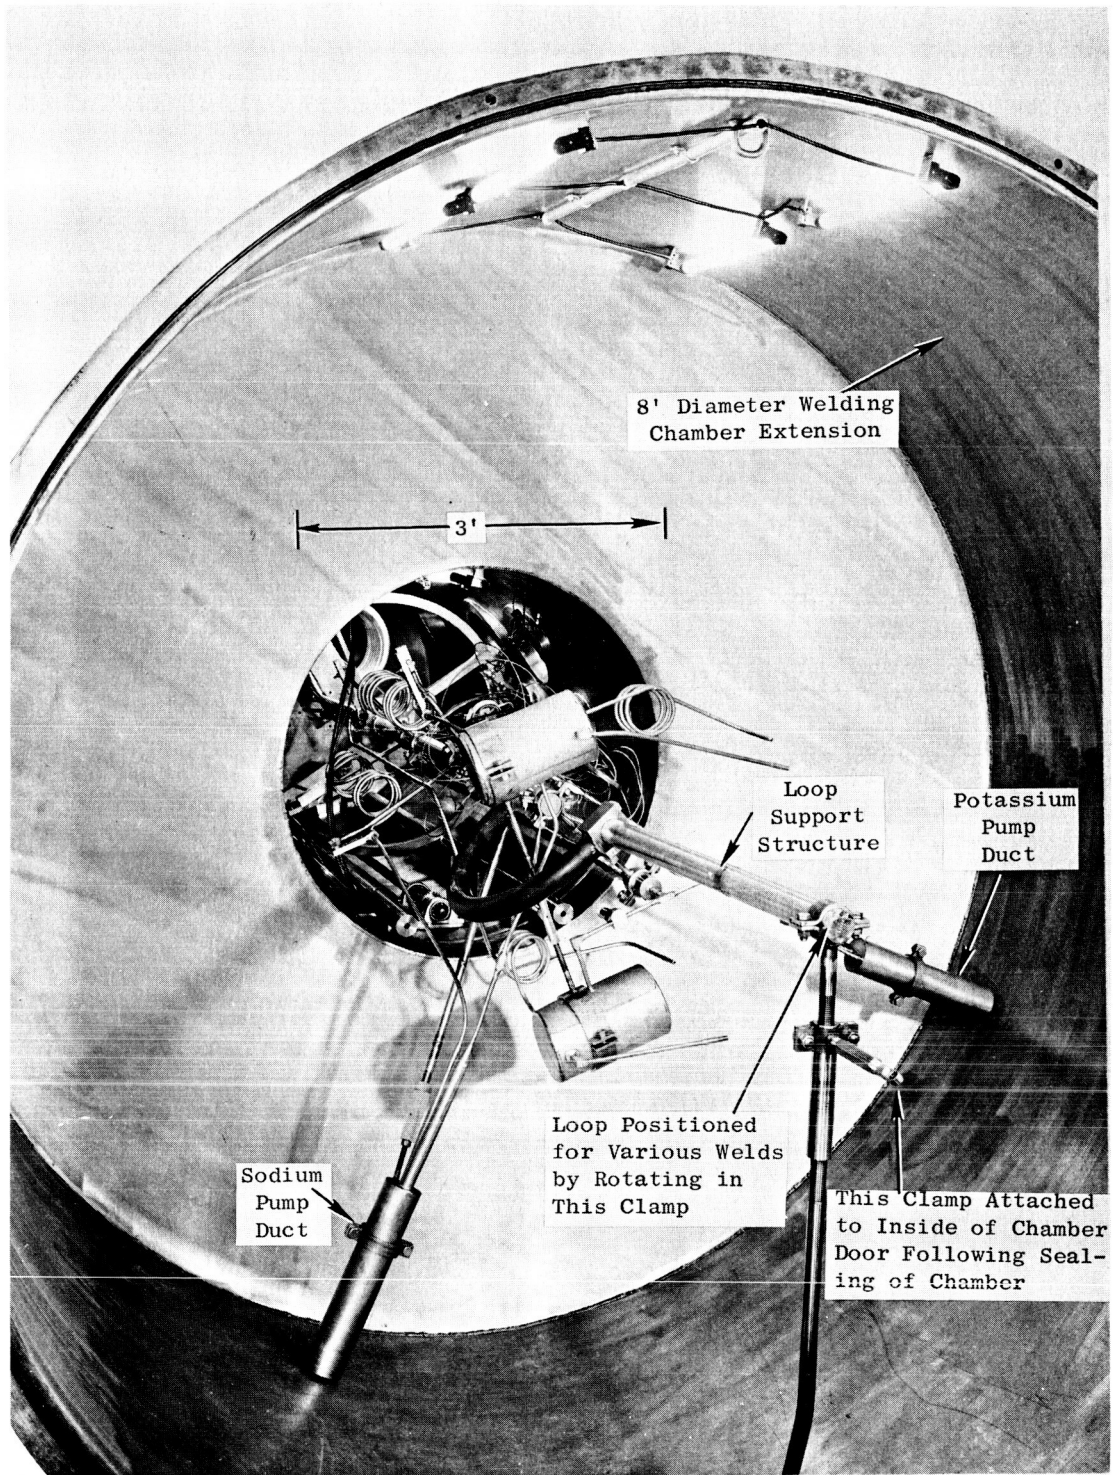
Prototype Corrosion Loop Positioned in the Welding Chamber During Final Assembly. (Orig. C65051295)
